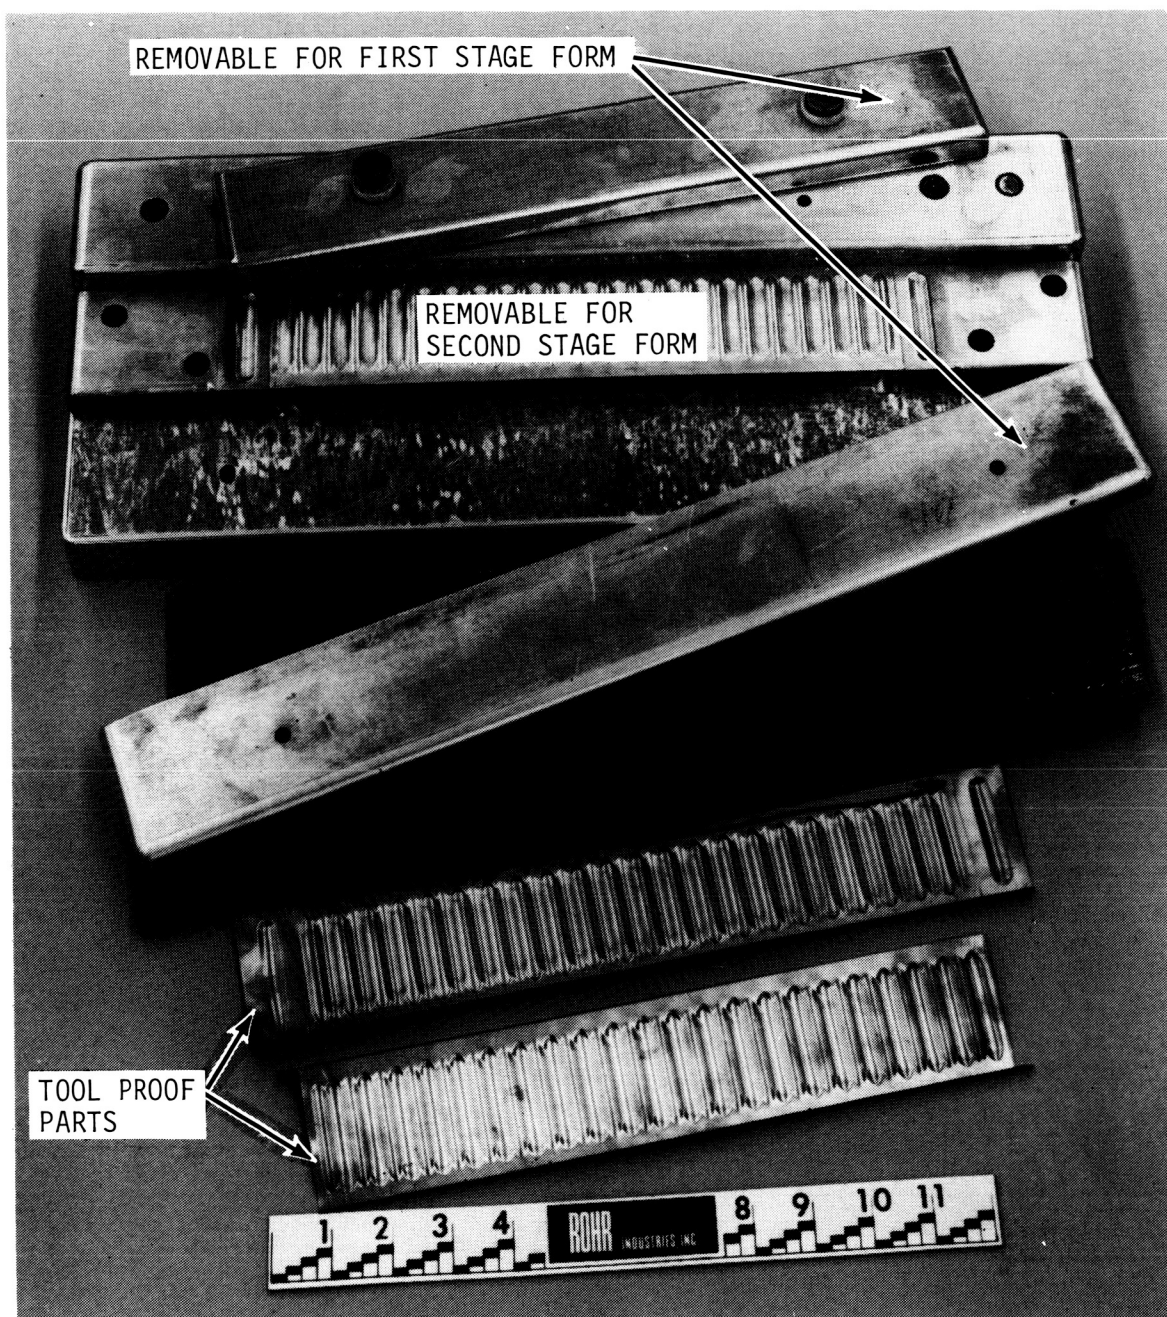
6061 Aluminum Form Block With Removable Details and Tool Proof Parts
